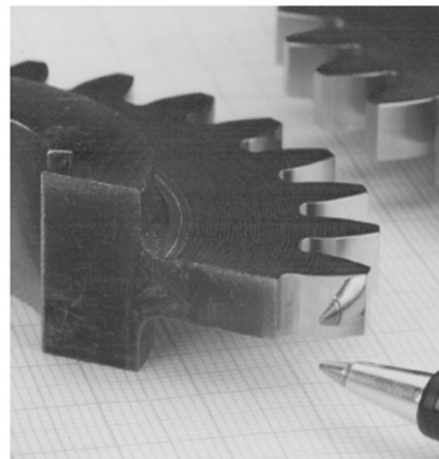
Example of super finished tooth surfaces [25]
